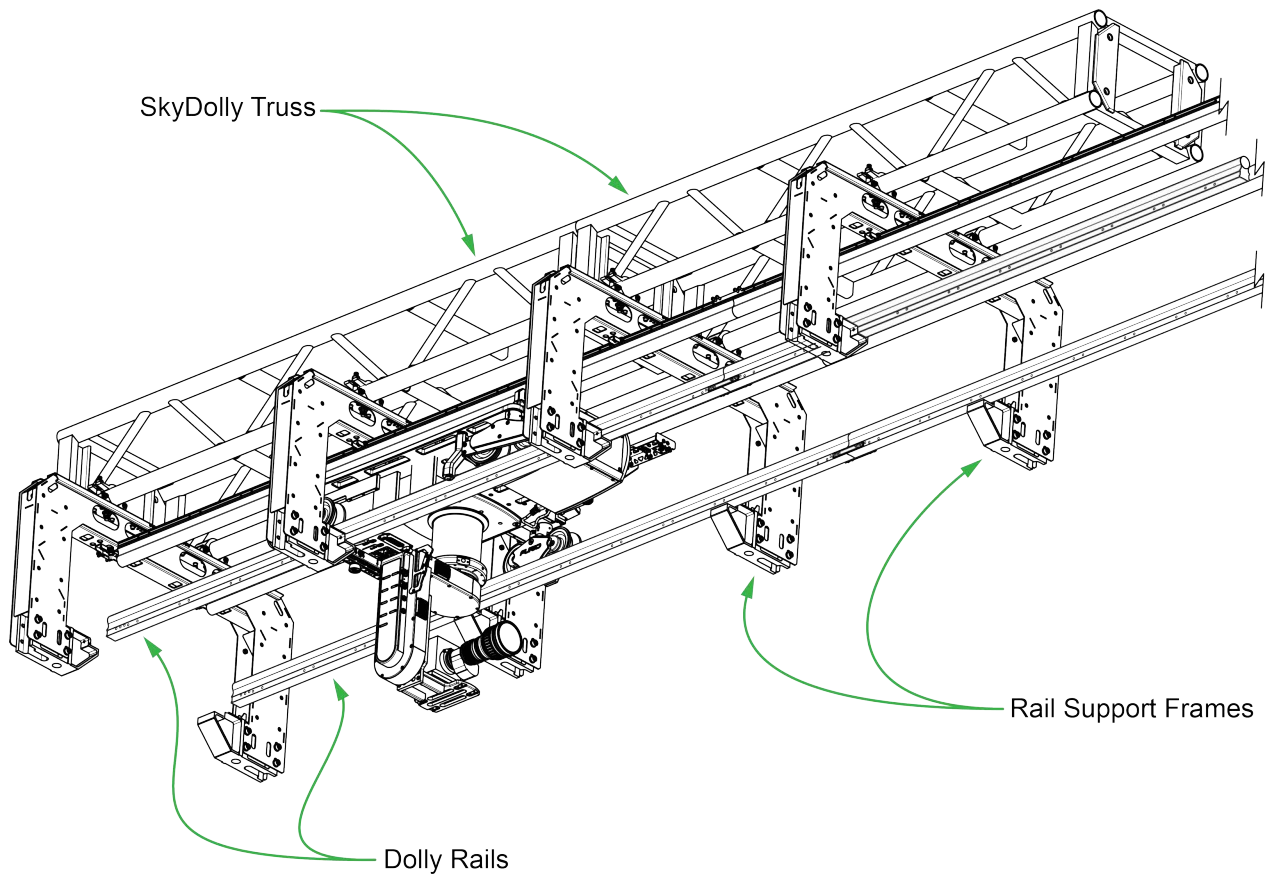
Furio SkyDolly Suspended Track (end view) - Box Truss
